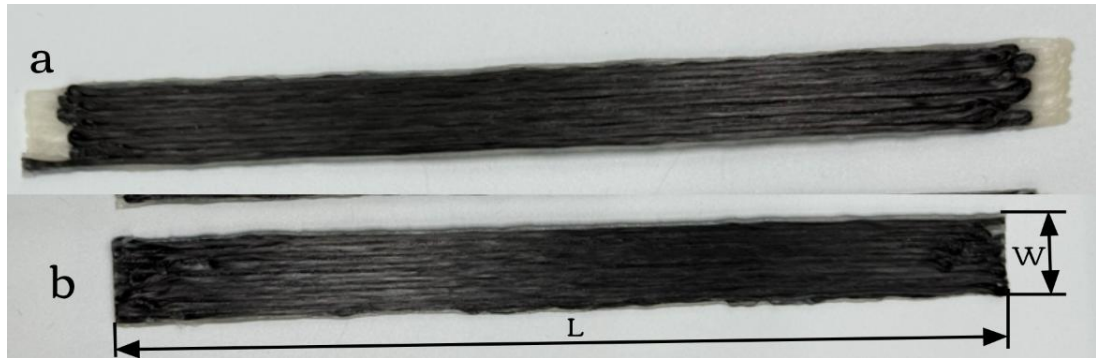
Composite specimen: a – printed specimen without post-processing, b – specimen with trimmed ends (L – specimen length, W – specimen width)
